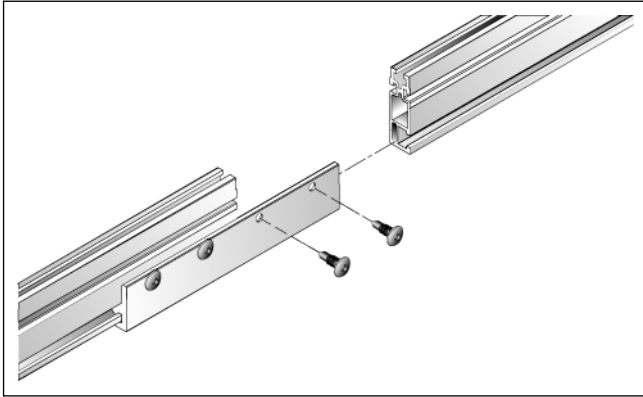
Splice bars slide into the footing bolt slots of SolarMount rail sections.
